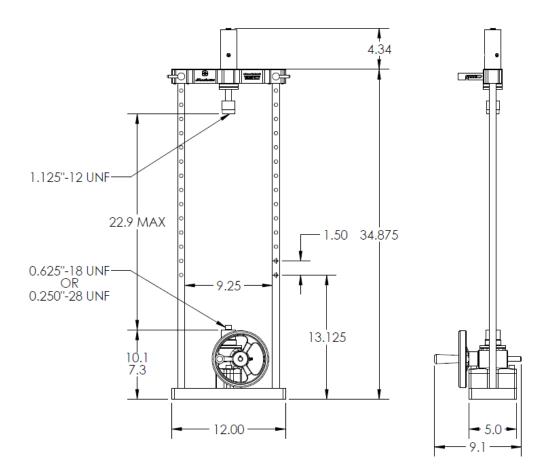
Dimension Guide for PCM2K-2 Machine Model
